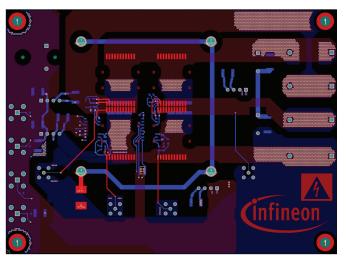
PCB Layout: top-layer copper (red) and bottom-layer copper (blue) showing the fundamental power plane concept of this power converter. The two middle layers are hidden in this figure.
